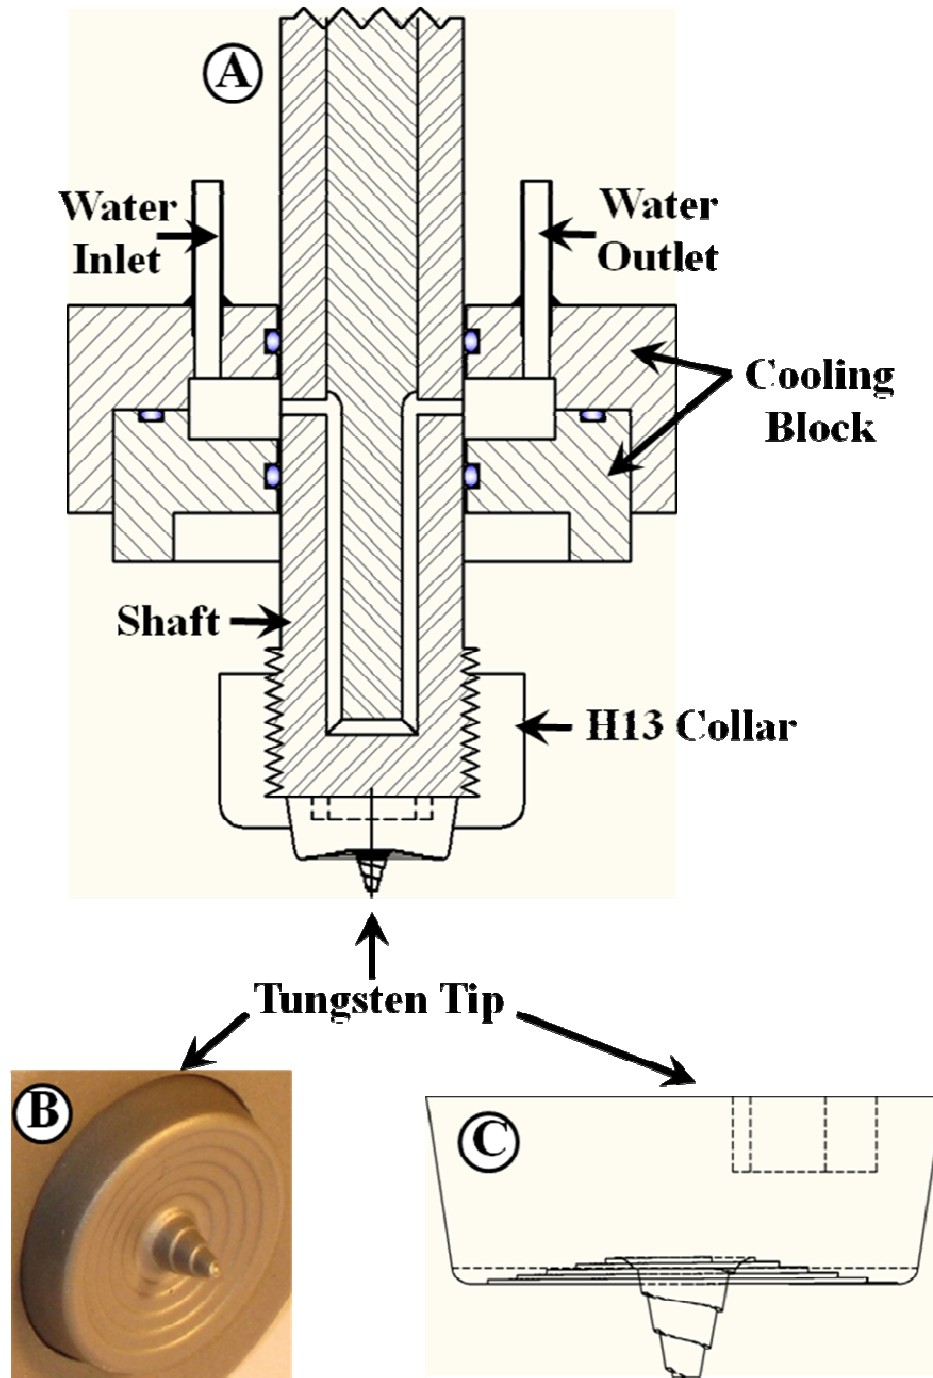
(A) Schematic design of FSP tool showing tungsten tip, H13 collar and shaft as well as cooling block. (B) Image of tungsten tool-tip. (C) Schematic of tungsten tip showing scroll in shoulder and pin.
